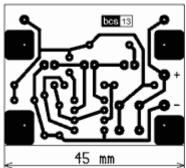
The printed circuit board of the voltage indicator. Click to get a picture at 600 dpi Fig. 3. PCB layout indicator. Click to get 600 dpi resolution image
